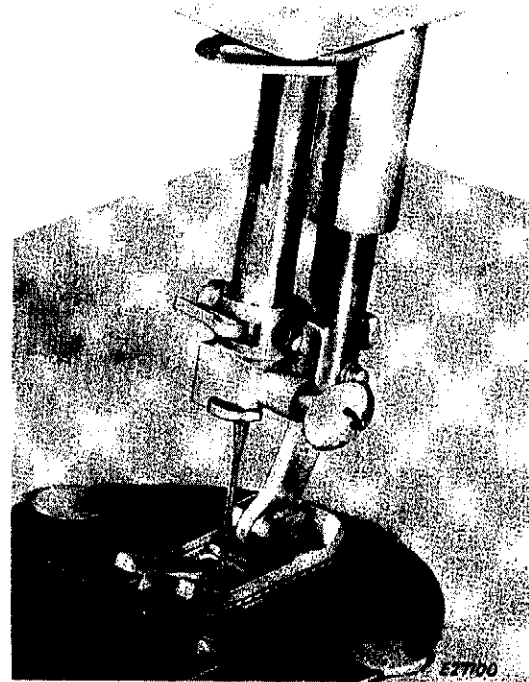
Presser Foot in Alignment with Slots in Throat Plate and with Feed Dog
